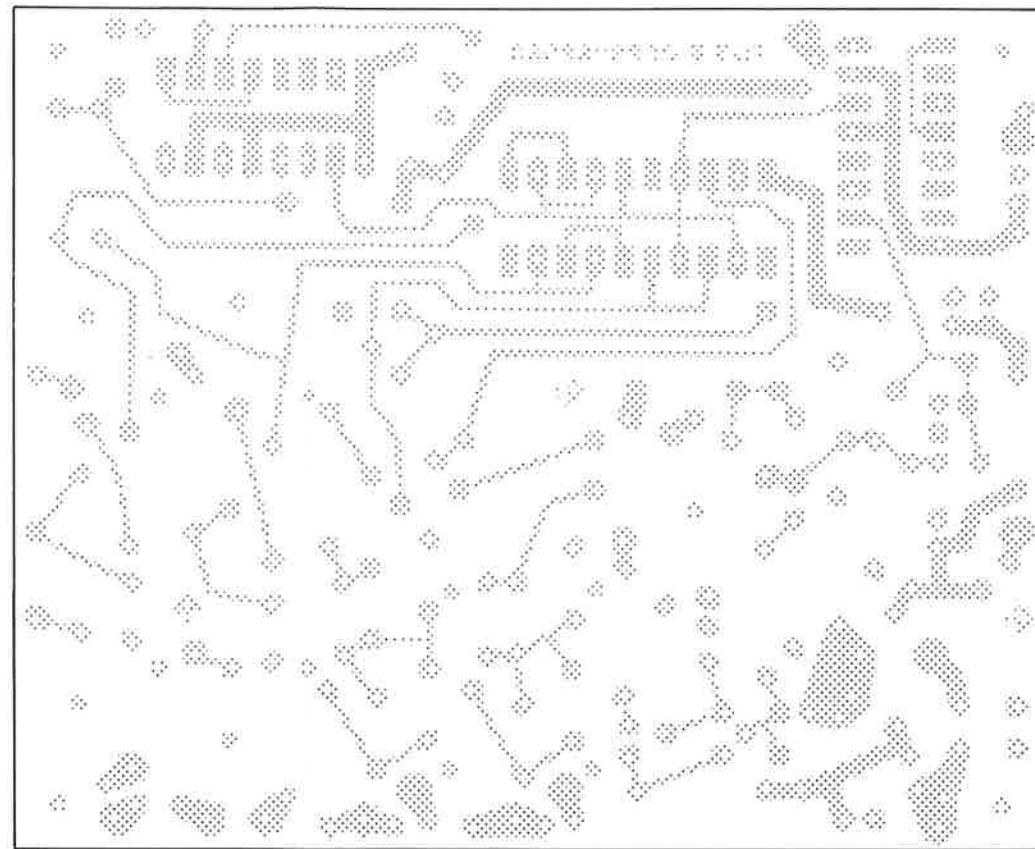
Printed Circuit Board 1A9A2, (P/N 52002-9409-1), Component Location Diagram (Sheet 1 of 2)
